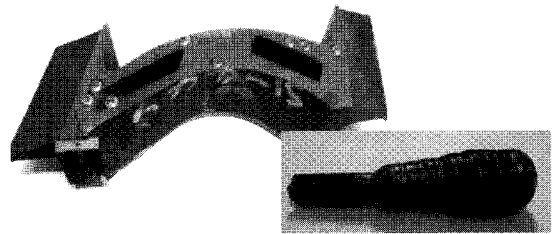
Cut-out specimen for the platform of GTD 111DS material blade(L) and overlay welding state(R)
